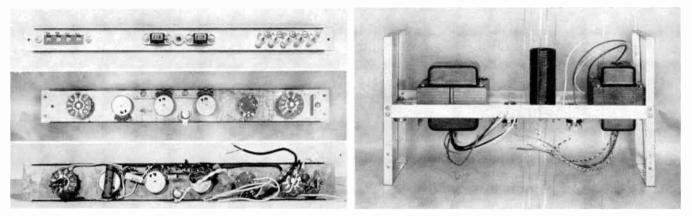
, loft: The rear terminal strip, and two views of the control panel. Fig. 3, right: First assembly stage calls for mounting these parts
